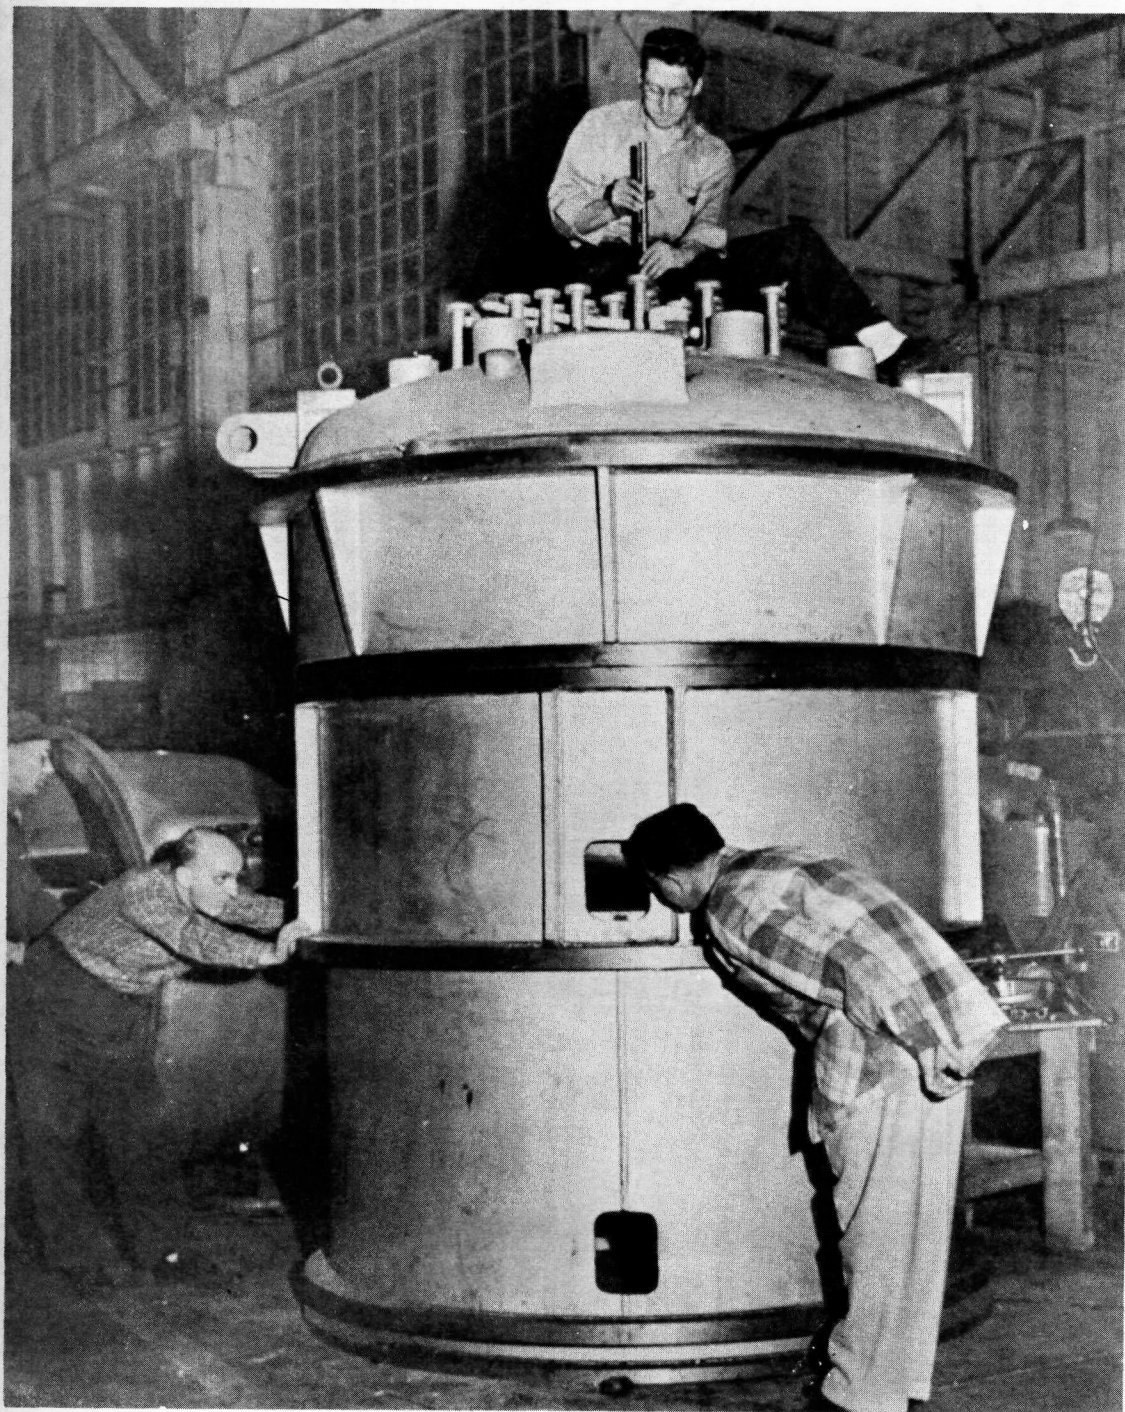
Master jig containing core and front shield plug (783-1)
